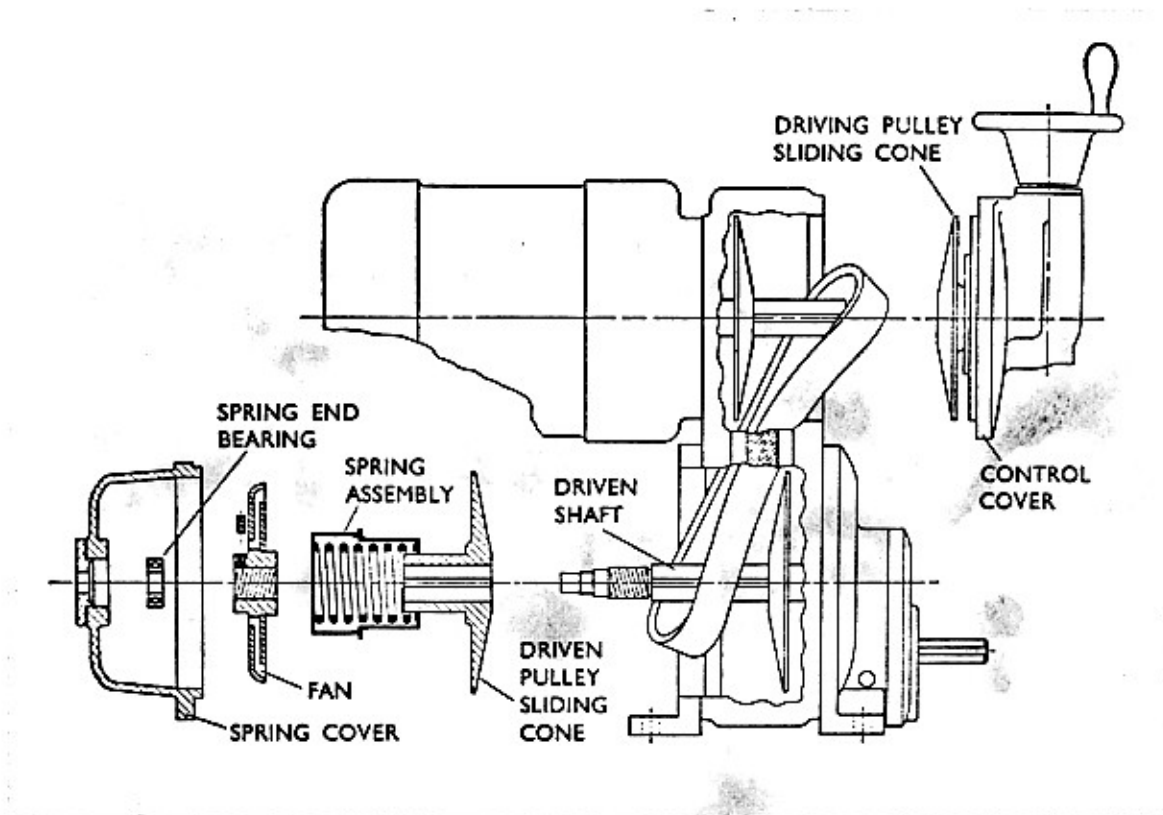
SECOND BOTTOM HEAD - BELT REPLACEMENT
